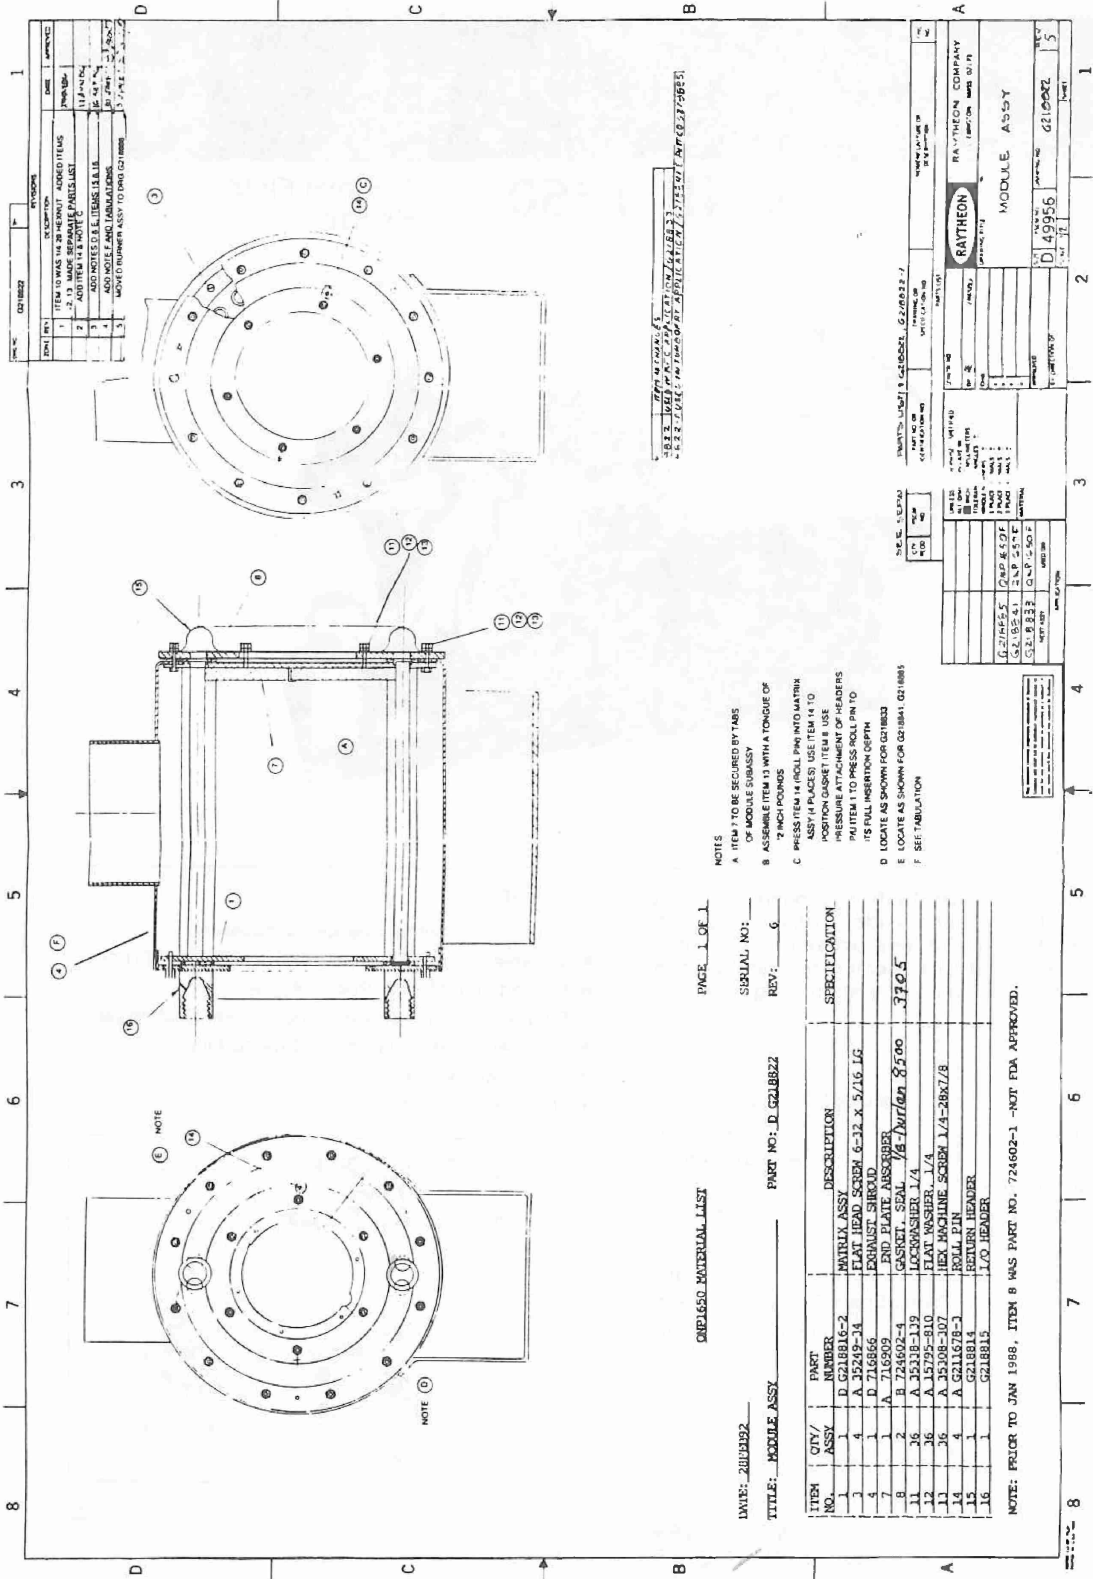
Thermal Fluid Heater Heat Exchanger Assembly
